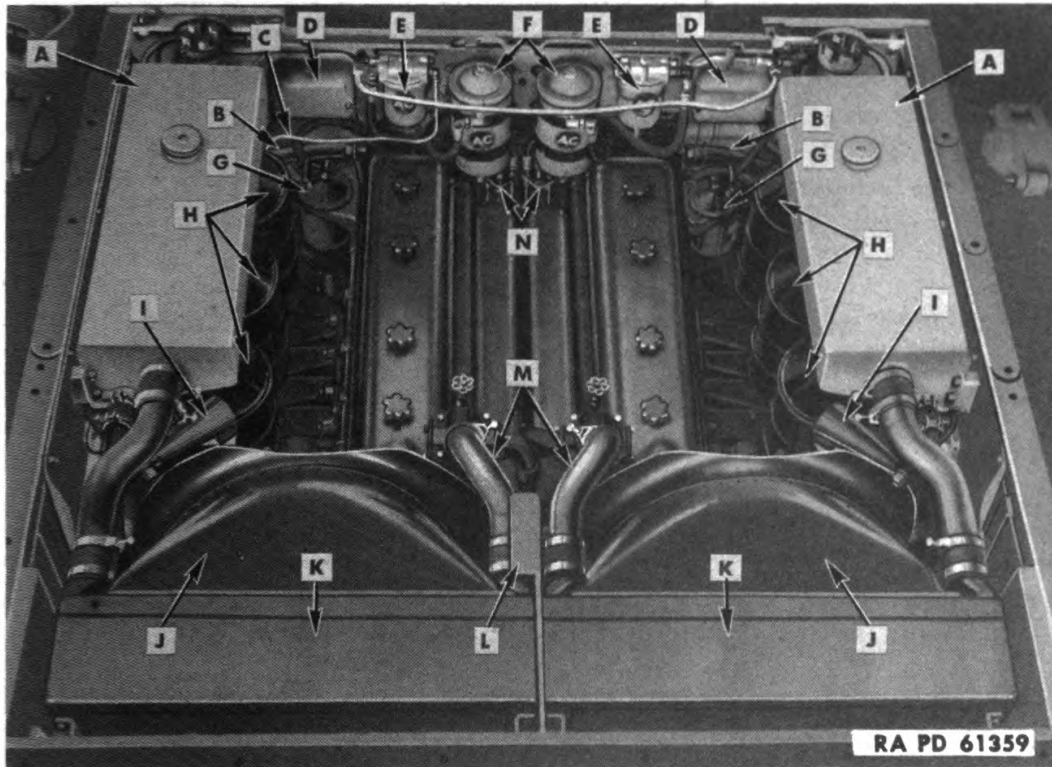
Flywheel End of Power Unit with Bulkhead Opening Covers Removed
